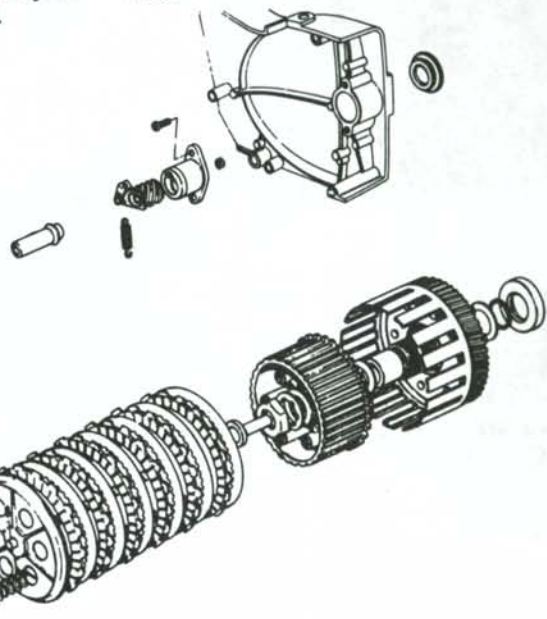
Clutch assembly used on early model TS 250. Basic parts are similar to TS 250 R unit in Fig. S12-12.
